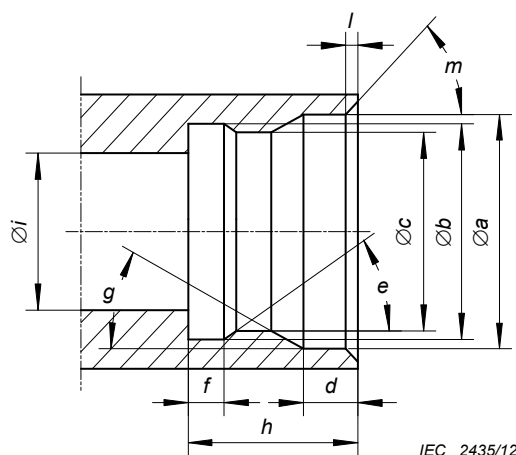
Gauge with limited detent for outer contact of connector with socket-outer contact
